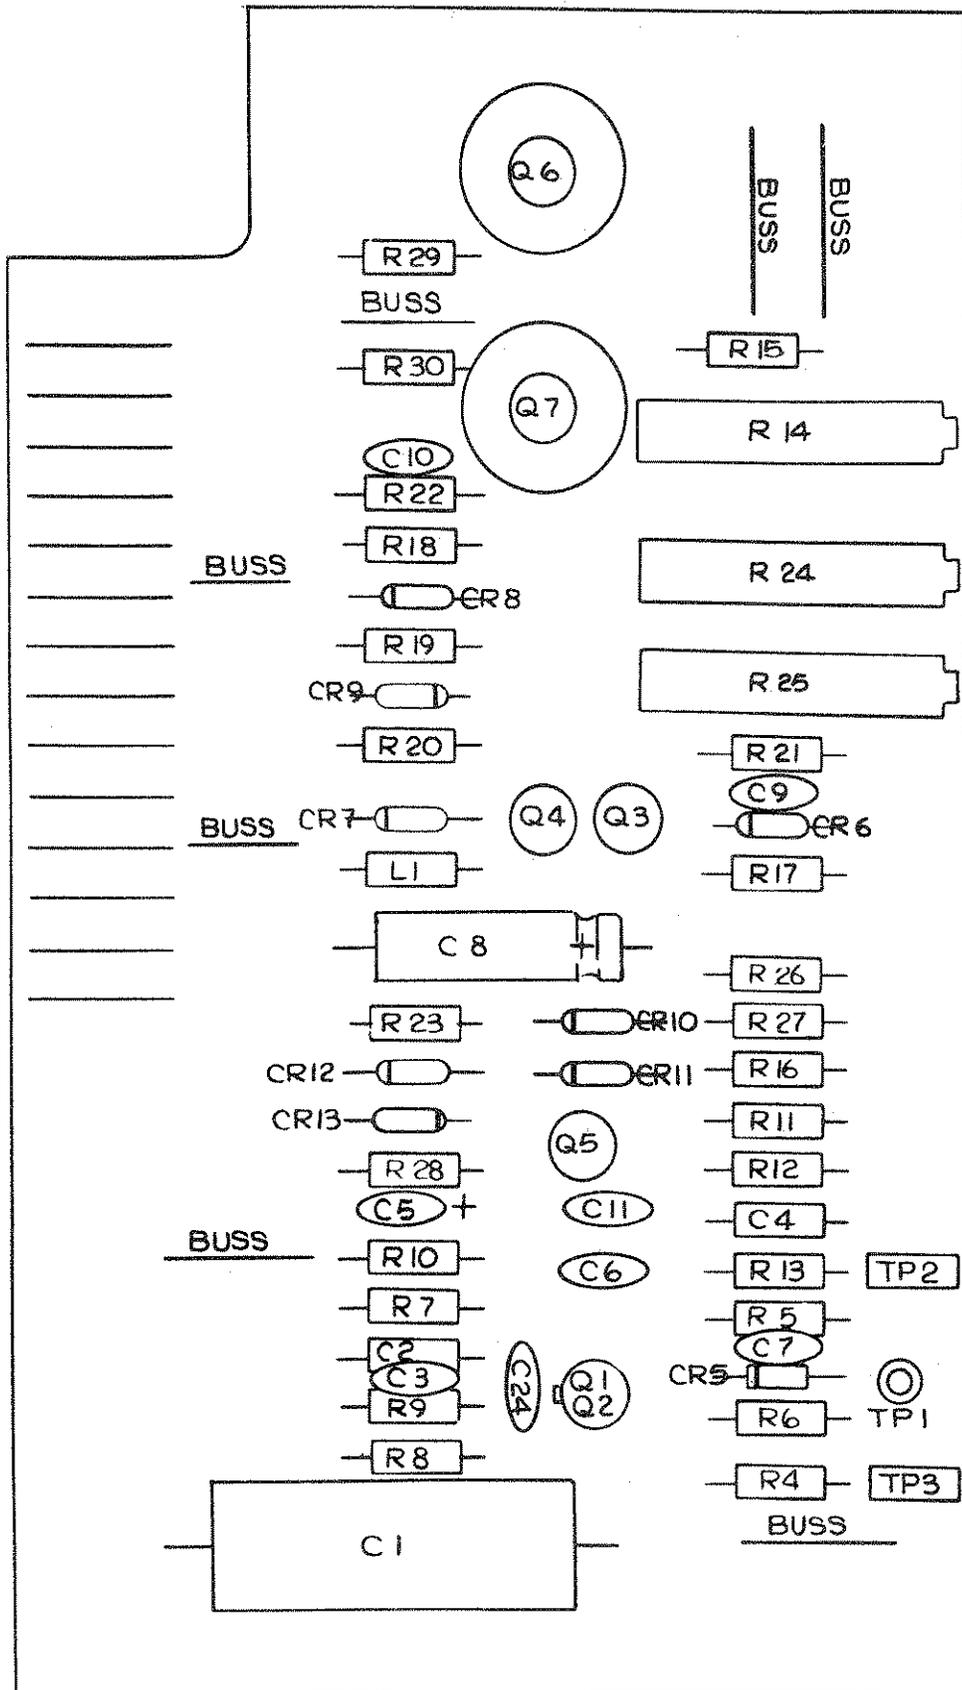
Models 251 and 501A Amplifier Board Assembly Parts Layout, Dwg. No. 620-210-00
